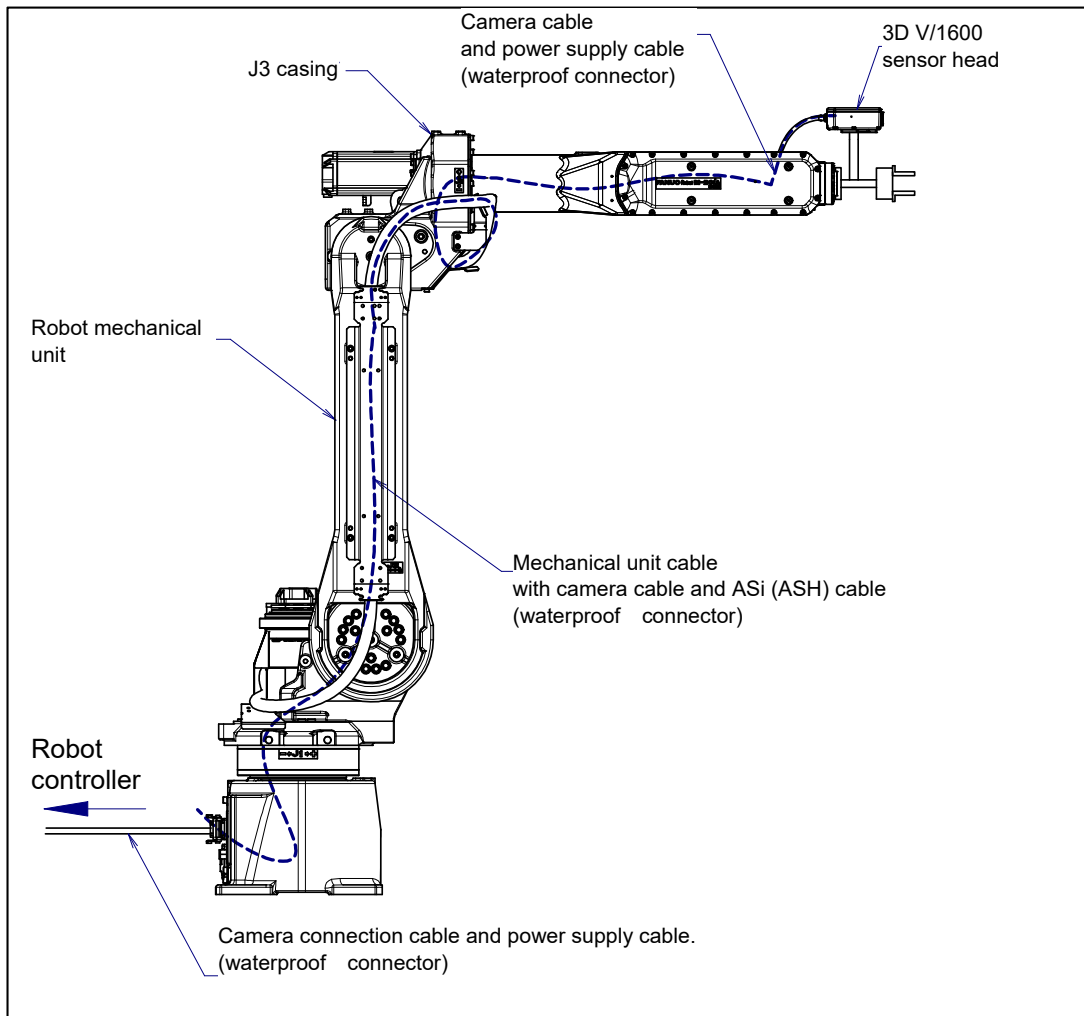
(a) Wiring of the 3D Vision Sensor (hand camera)
